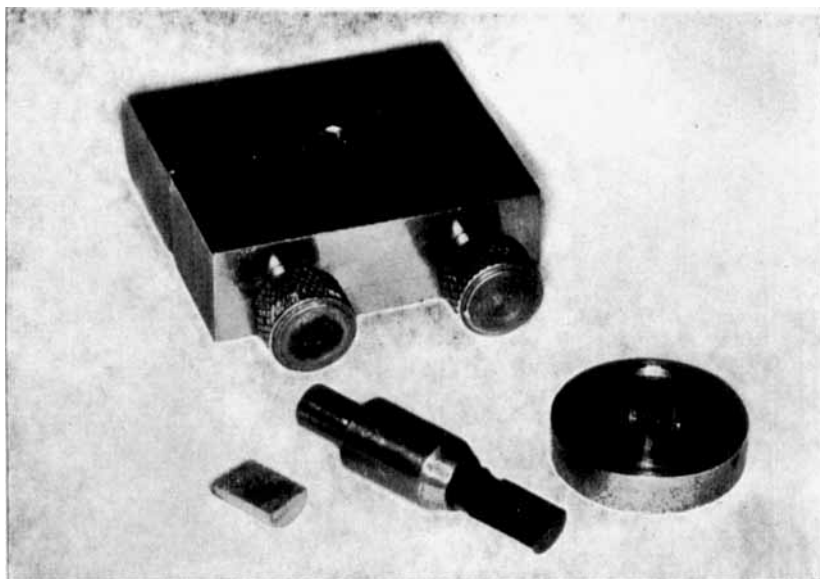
Steel mould with pistons used in the preparation of the semi-cylindrical specimens. A specimen is seen in front to the left.
